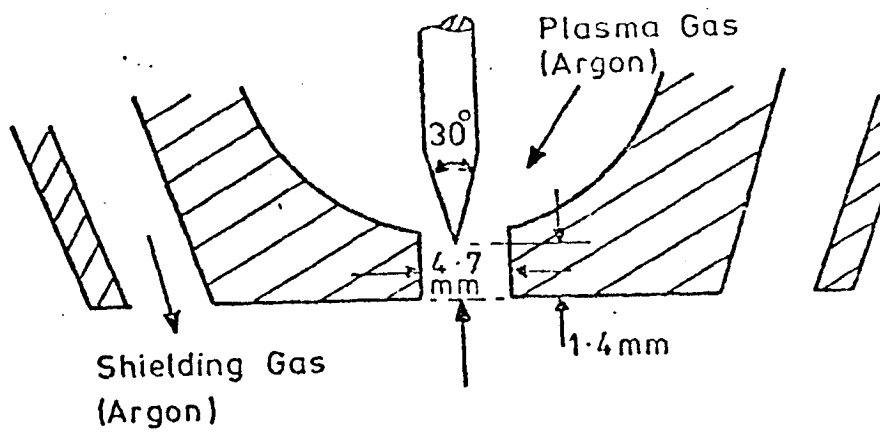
Geometry of Electrode Position at the Cathode in Plasma Welding
